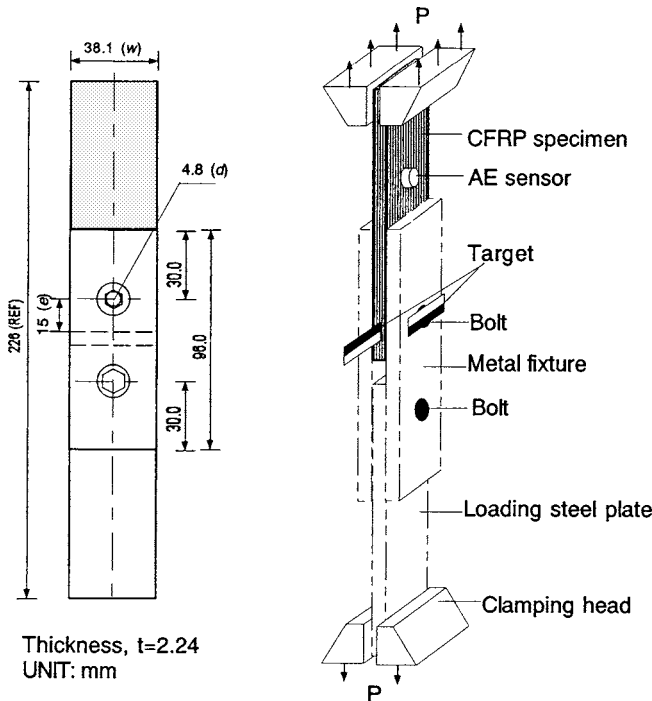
Geometrical configuration and testing setup of bolted joint specimens.
